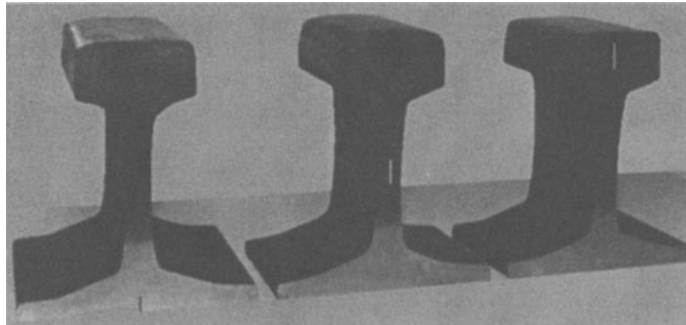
Specimens used in the measurements. The model cracks were produced artificially by spark machining.
